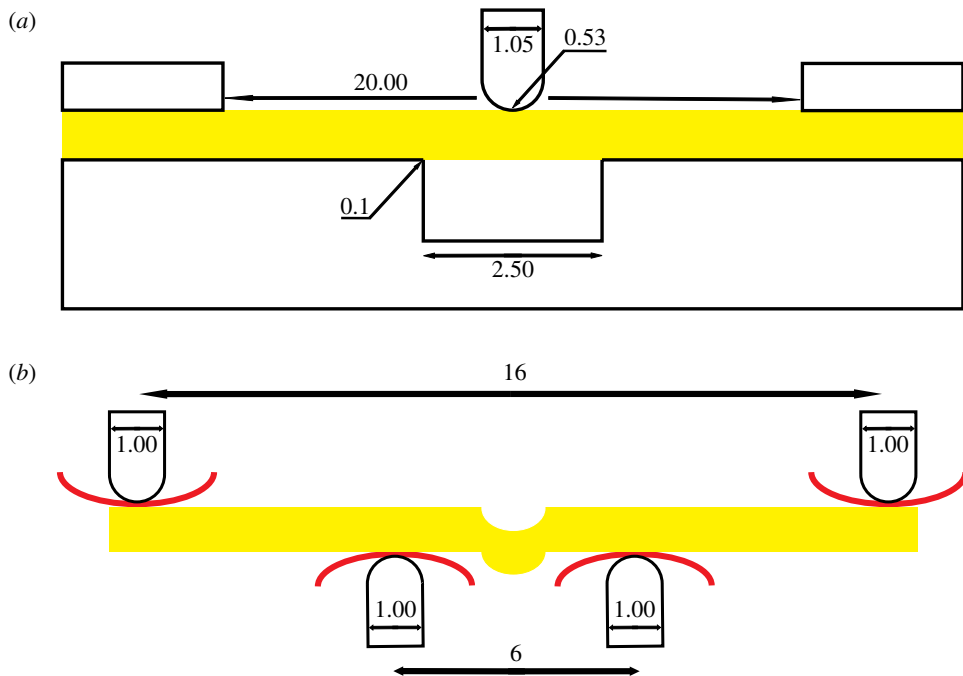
Sketch of the board sample placed (a) in the creasing tool and (b) in the folding tool after it has been creased. The grey (red online) curved lines between the sample and the four supports in (b) represent pieces of aluminium foil in the folding experiment. (Online version in colour.)
